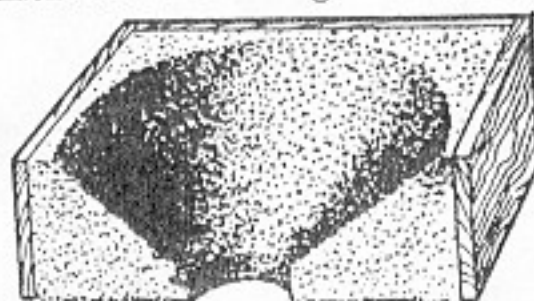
Section through runner cup, or sand funnel, through which the metal is poured into the runner. It may be made in a separate box or hollowed out in the sand of the cope.
